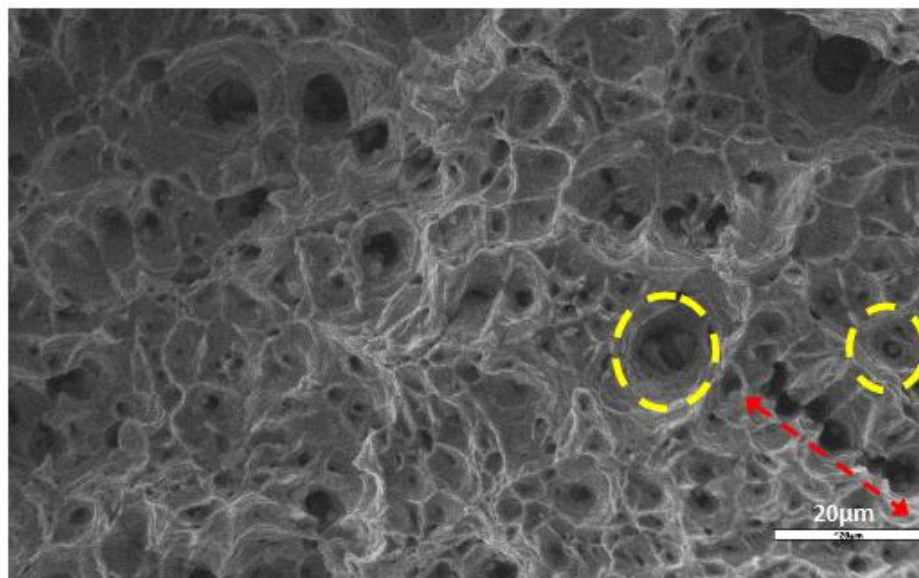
Ductile fracture features after tensile test, NT “large” specimen.
